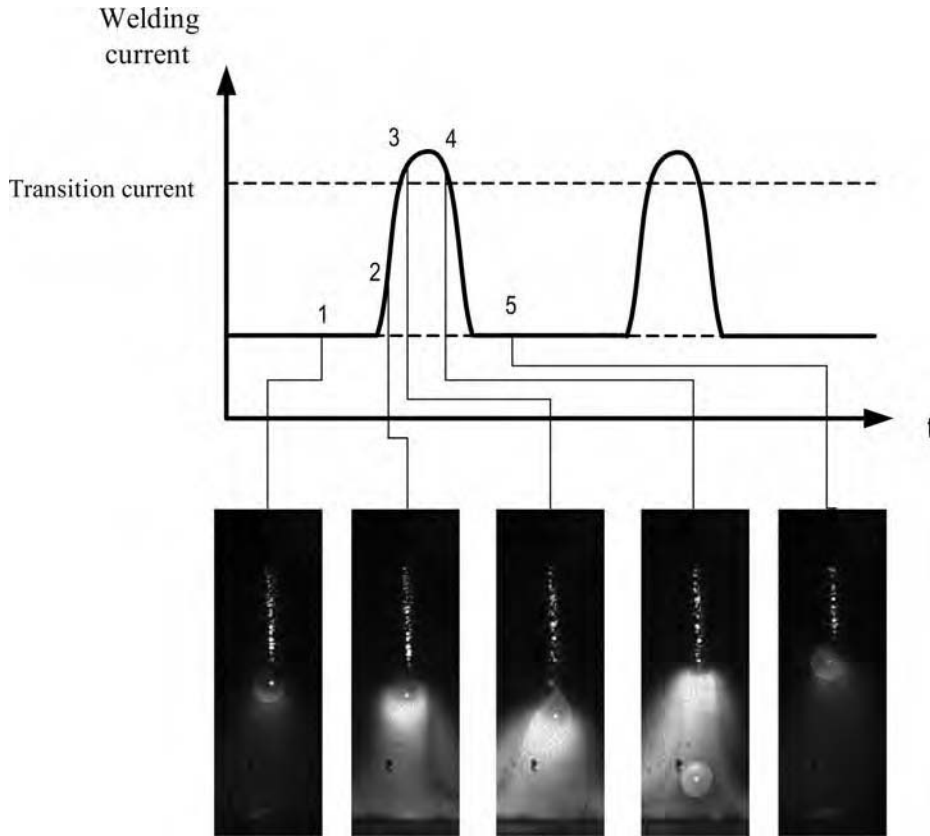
Typical pulsed gas metal arc welding process
